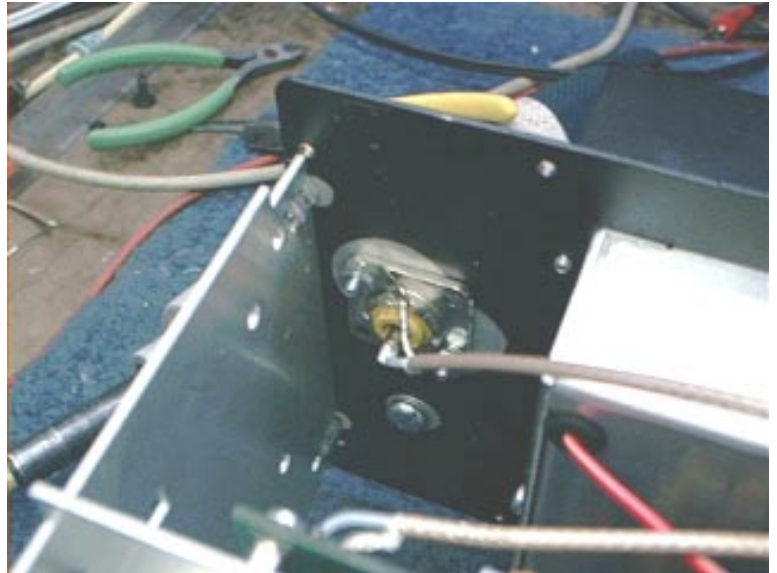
Tuner output coax soldered to the SO-239 connector.
